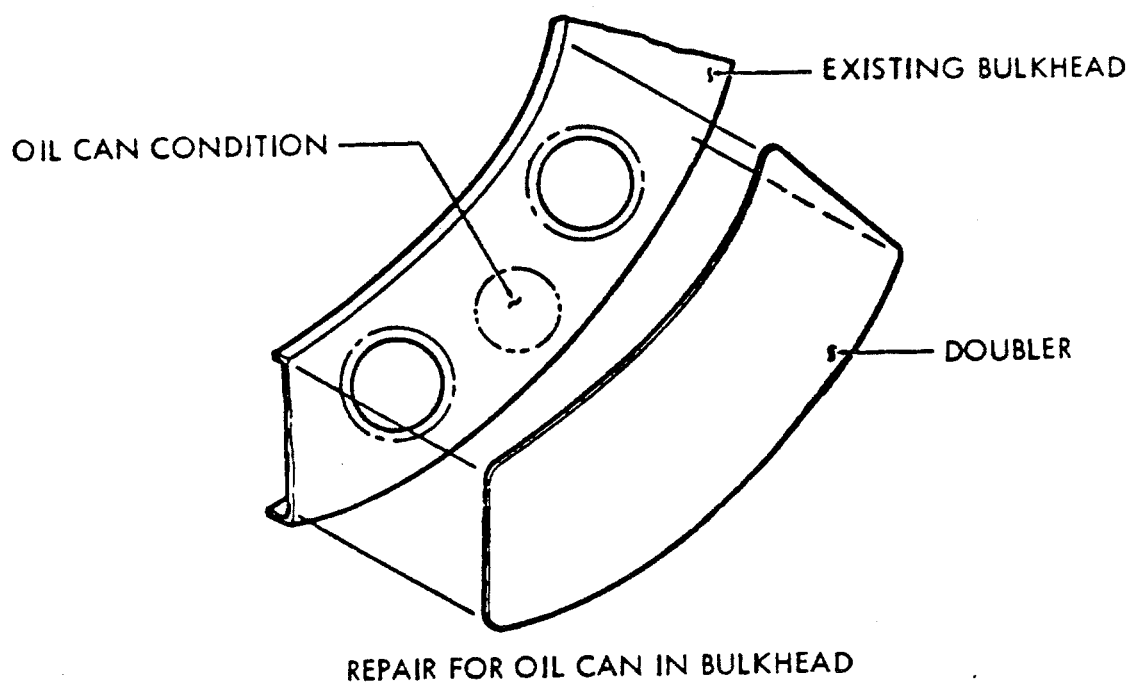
OIL CAN REPAIR IN BULKHEAD (SHEET 1 OF 3)
